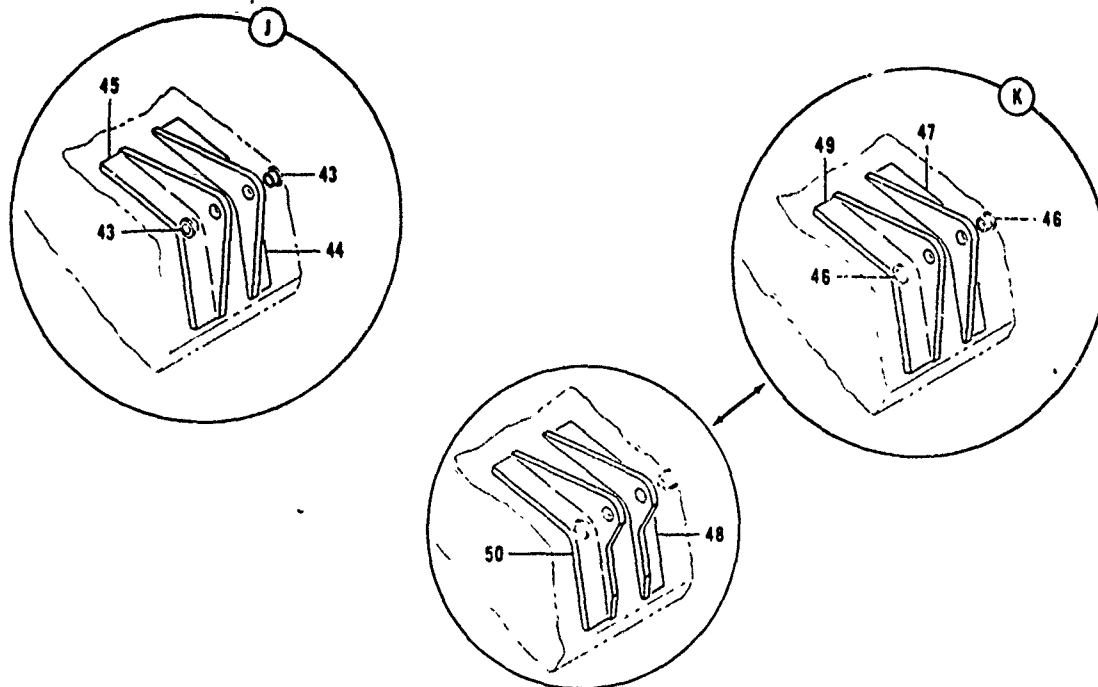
Main Gear Inboard Door Assemblies (Sheet 3 of 3)
